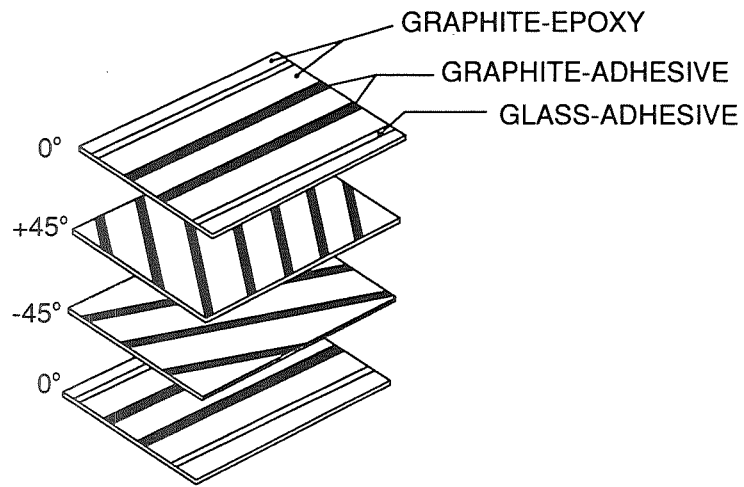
Damage Control Concept employing graphite-reinforced adhesive strips to contain delamination damage and glass-reinforced adhesive strips to contain running tension cracks.
